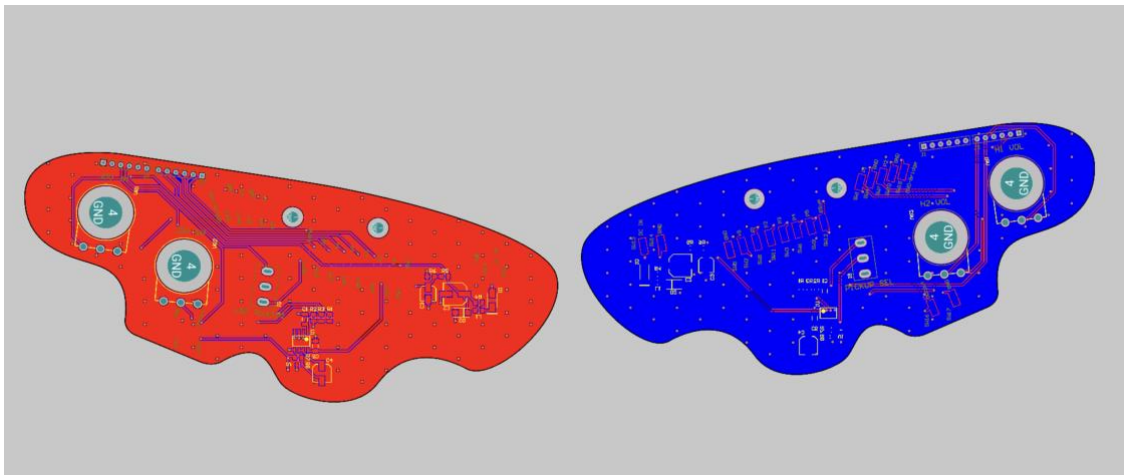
PCB Layout. Left: Top Layer. Right: Bottom Layer.
